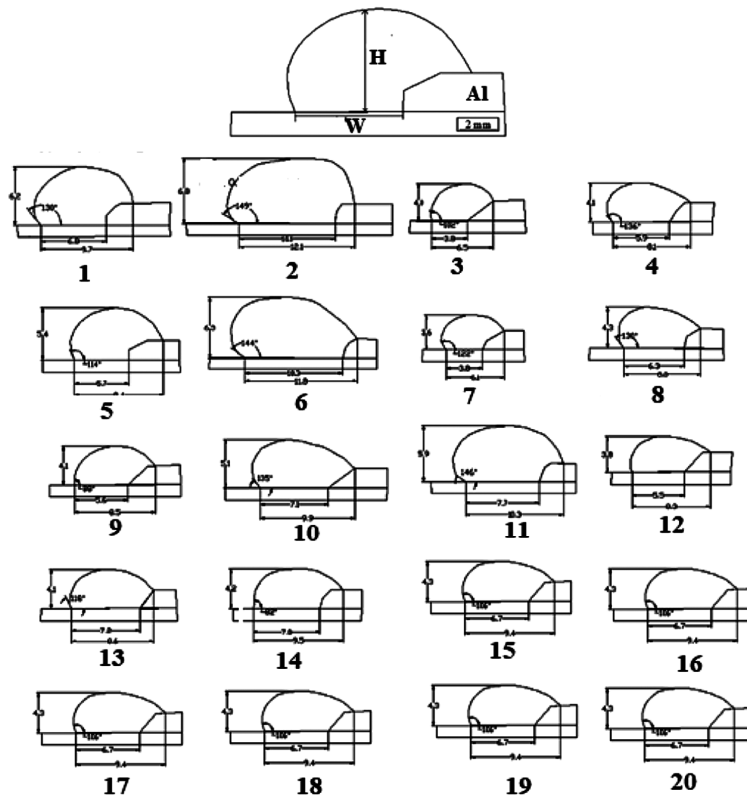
Bead geometry (cross section) images as per DOE welding runs.
